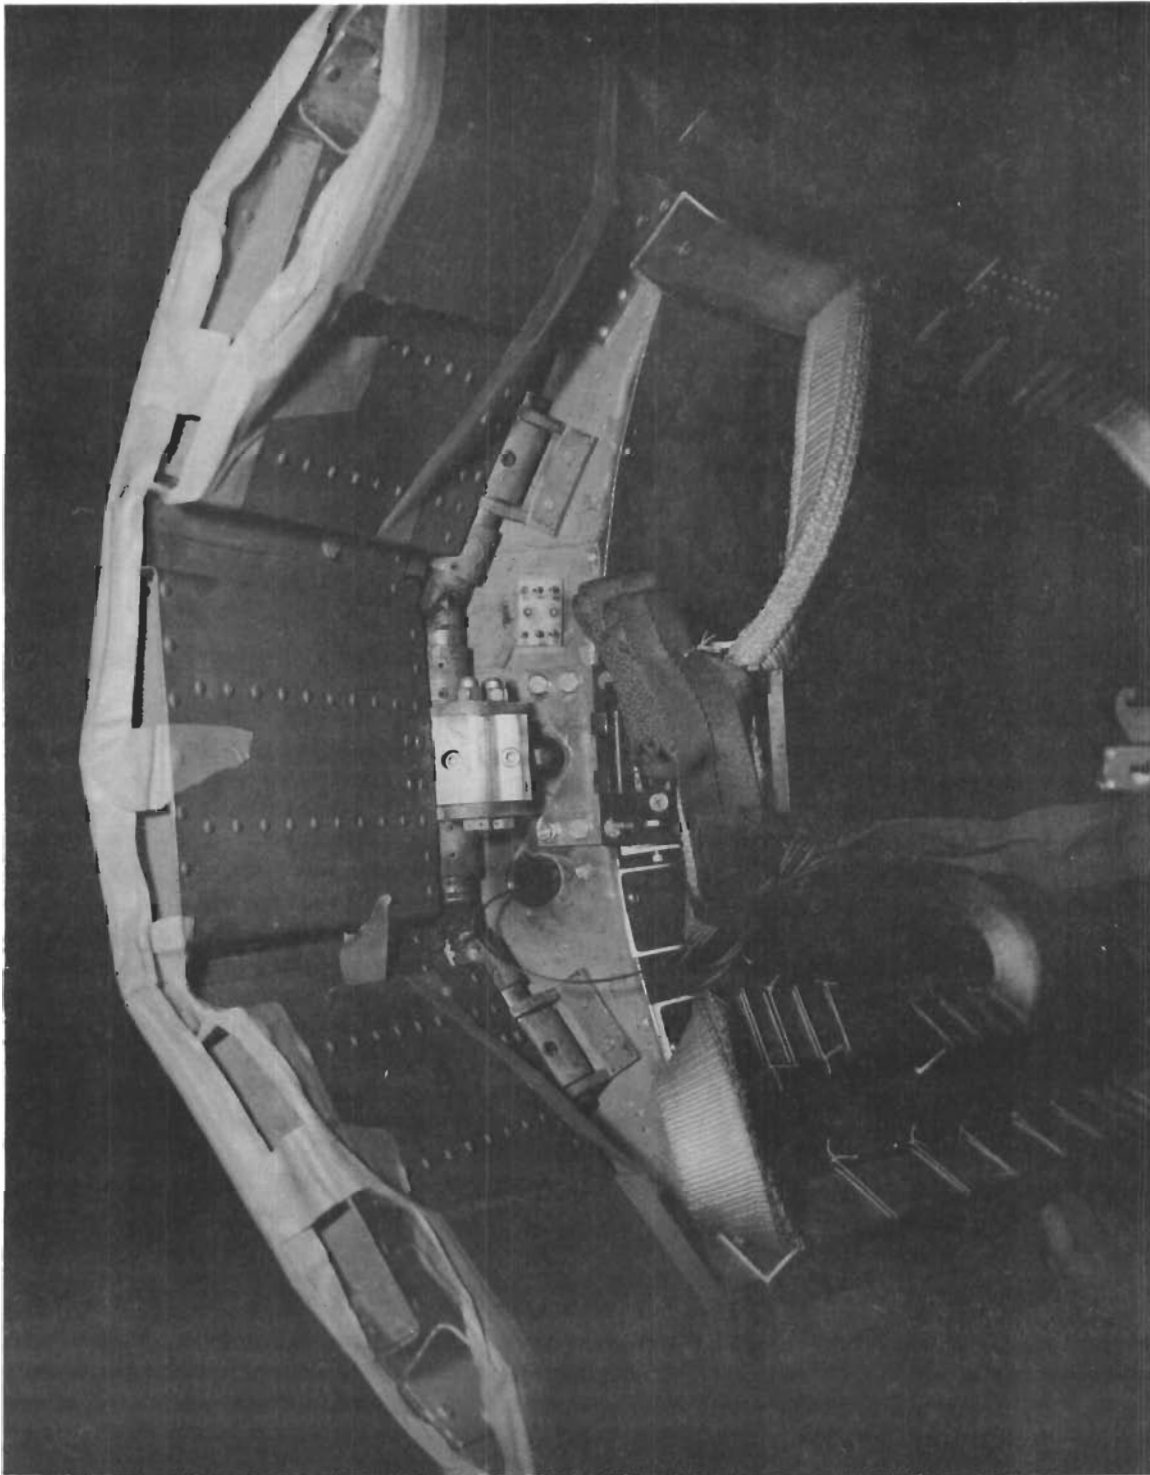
Riser Guide Assembly of Drogue Parachute (WWRMDD-12-1 Assembly)
